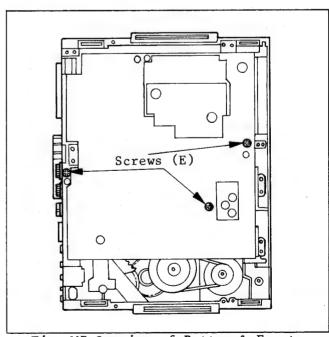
Opening of Bottom & Front P.C. Boards-(1)
